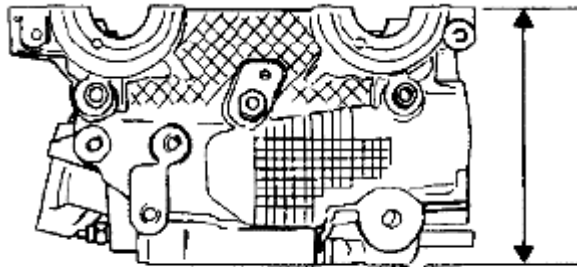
Inspecting Length And Width Of Cylinder Head For Deformation And Warpage
